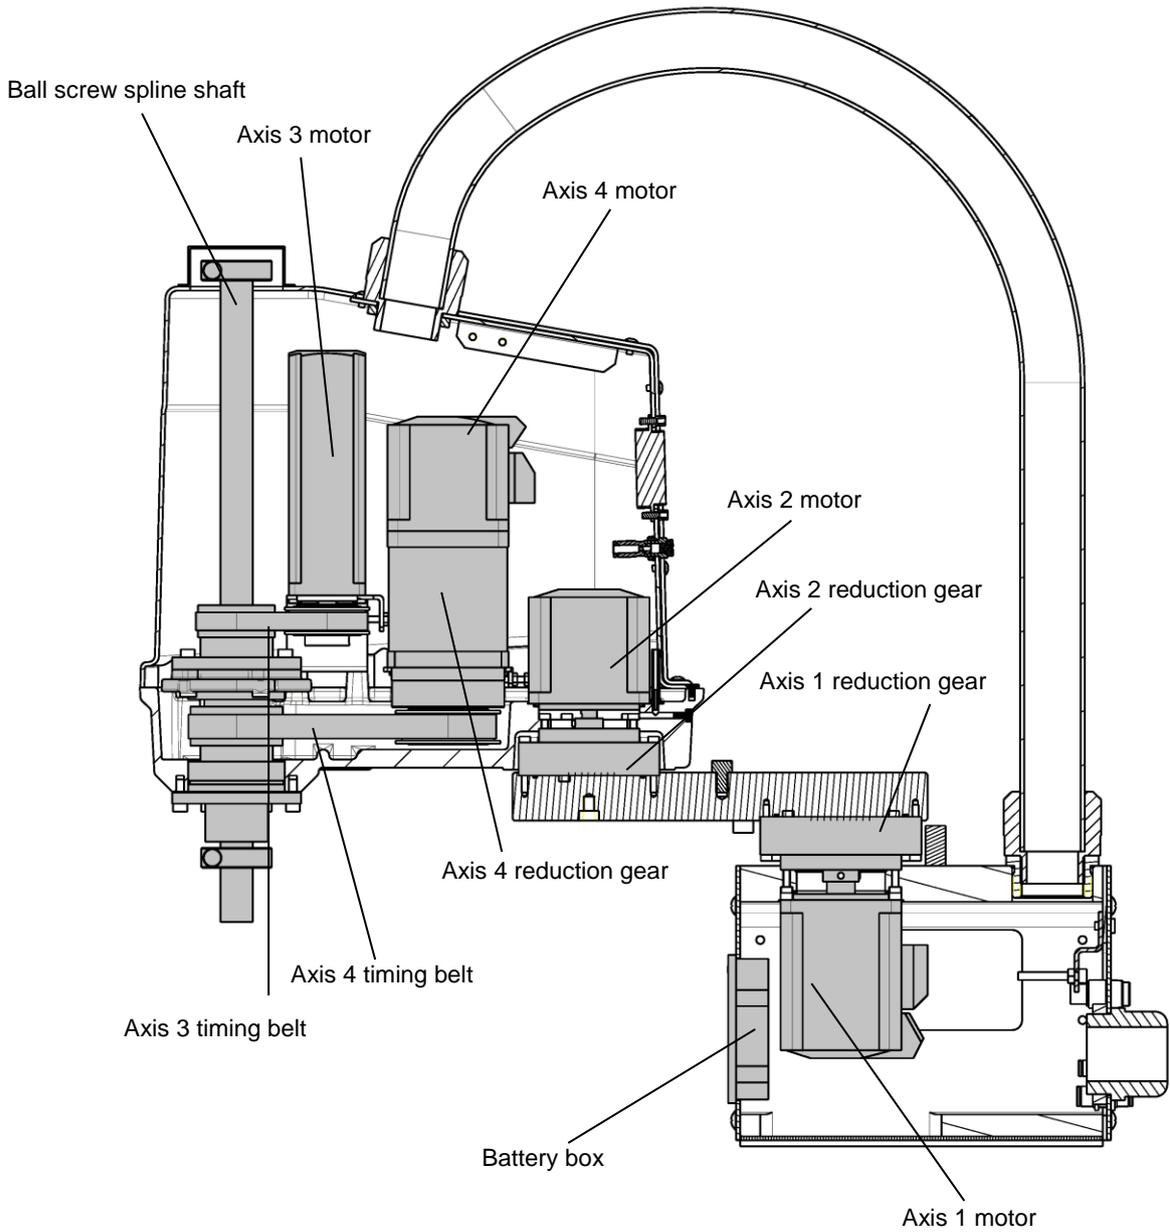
Layout of robot mechanical components (KHL-300NSCN/KHL-400NSCN)
